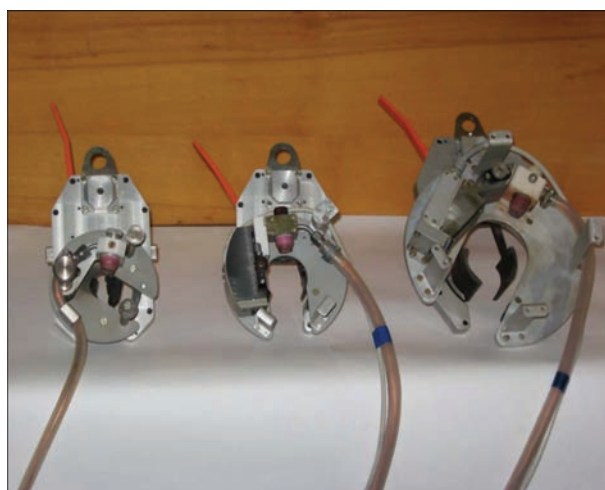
General view of welding heads ADTs 627.03.00.000, ADTs 625.03.00.000 and ADTs 626.03.00.000 on the side of their faceplates
